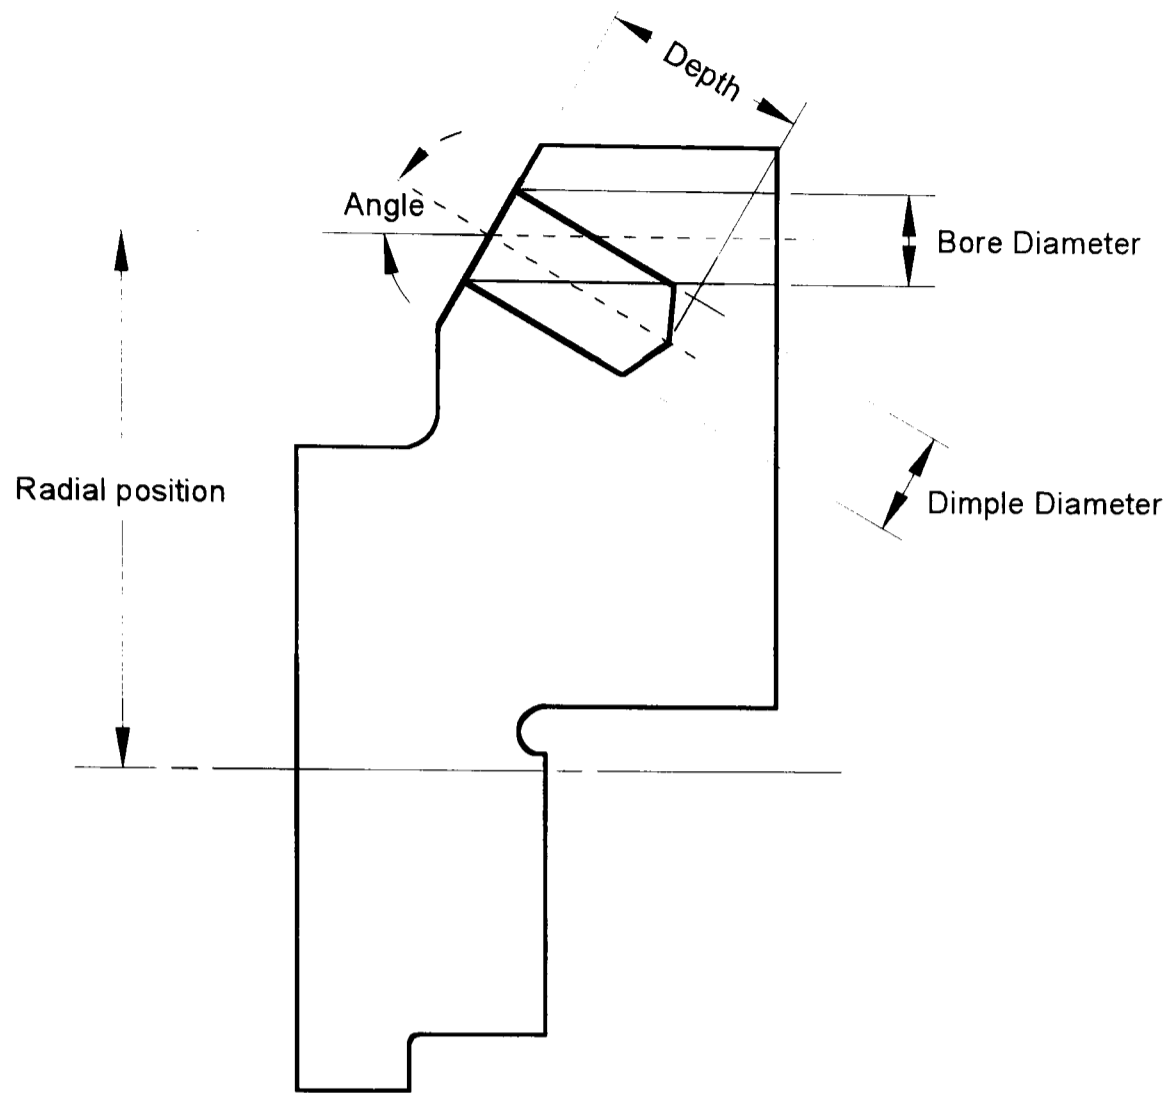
Definition of terms relating to crankpin bore holes and dimples
